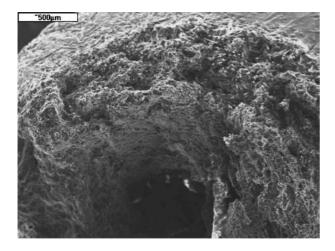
Fracture surface of CF/PLGA screw after "dry" fatigue tests (mag.  $50 \times$ ).
